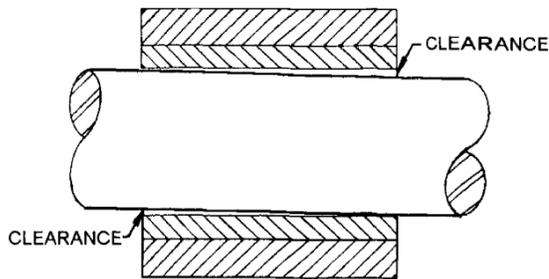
B – Checking both ends of the bearing will help in revealing shaft misalignment
